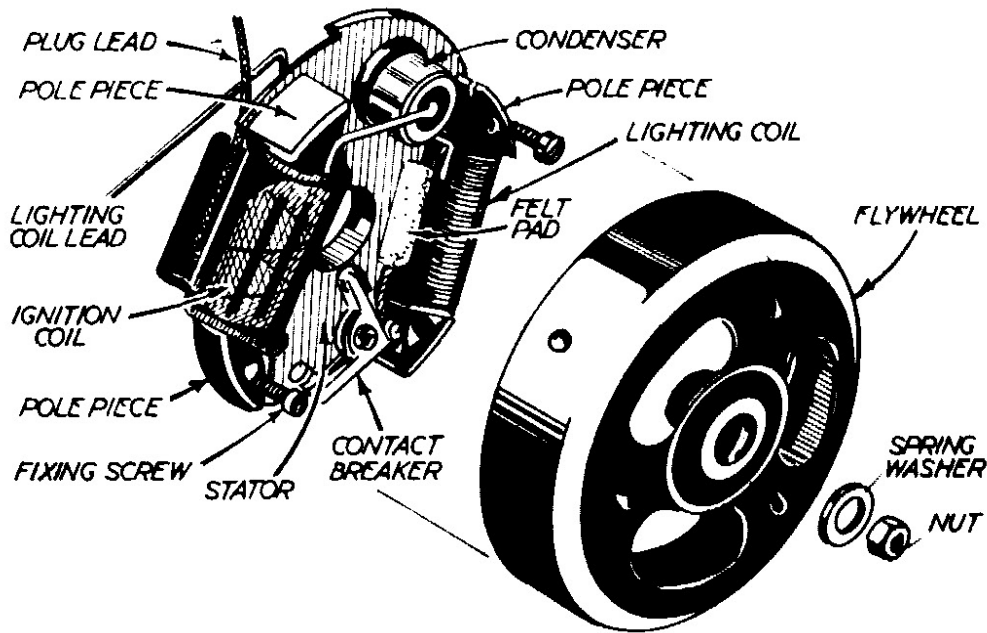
THE FLYWHEEL MAGNETO-GENERATOR IN DETAIL.
